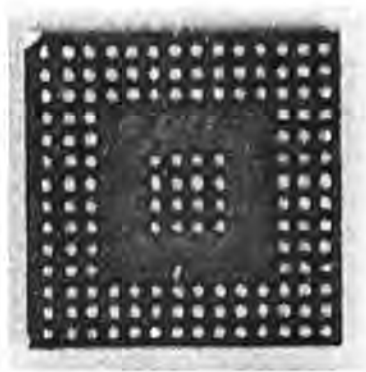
Underside of Test Package Indicating Solder Bump Configurations, 1X
